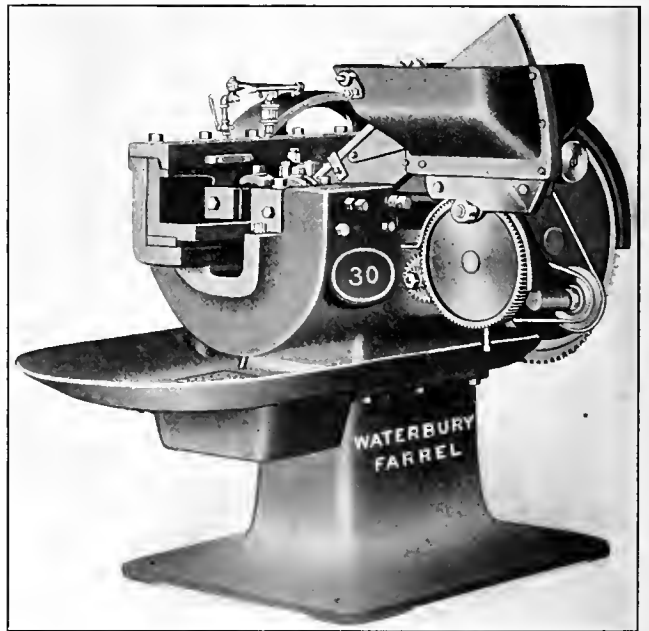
A Waterbury Farrel Foundry & Machine Co.'s Thread Rolling Machine with Automatic Hopper Mechanism
